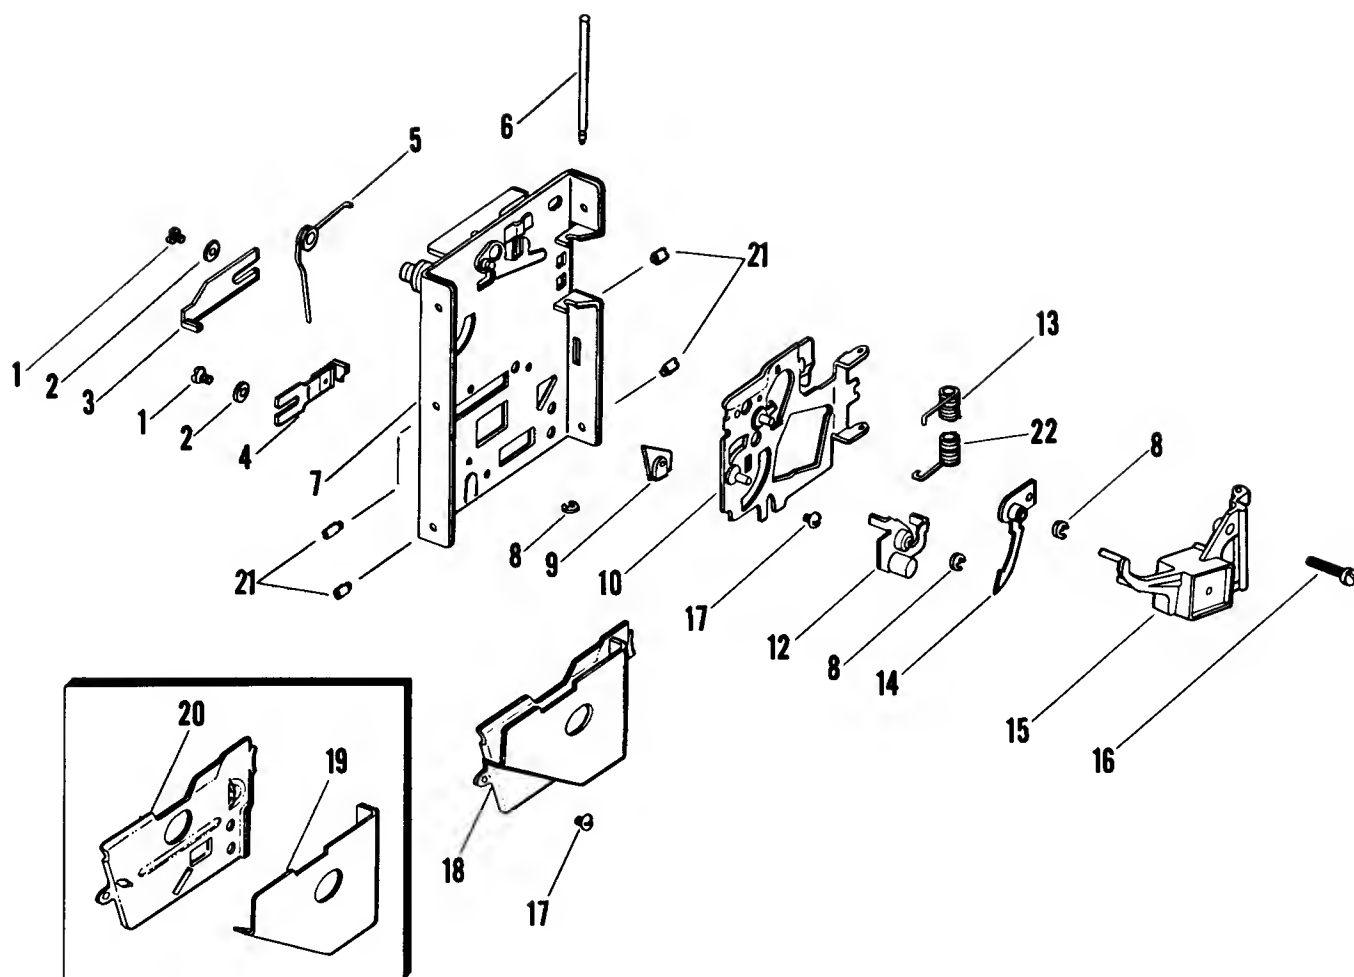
COIN ACCEPTOR EXPLODED VIEW
